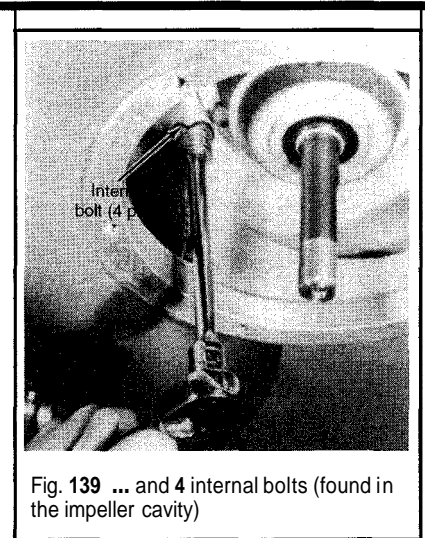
and 4 internal bolts (found in the impeller cavity)
